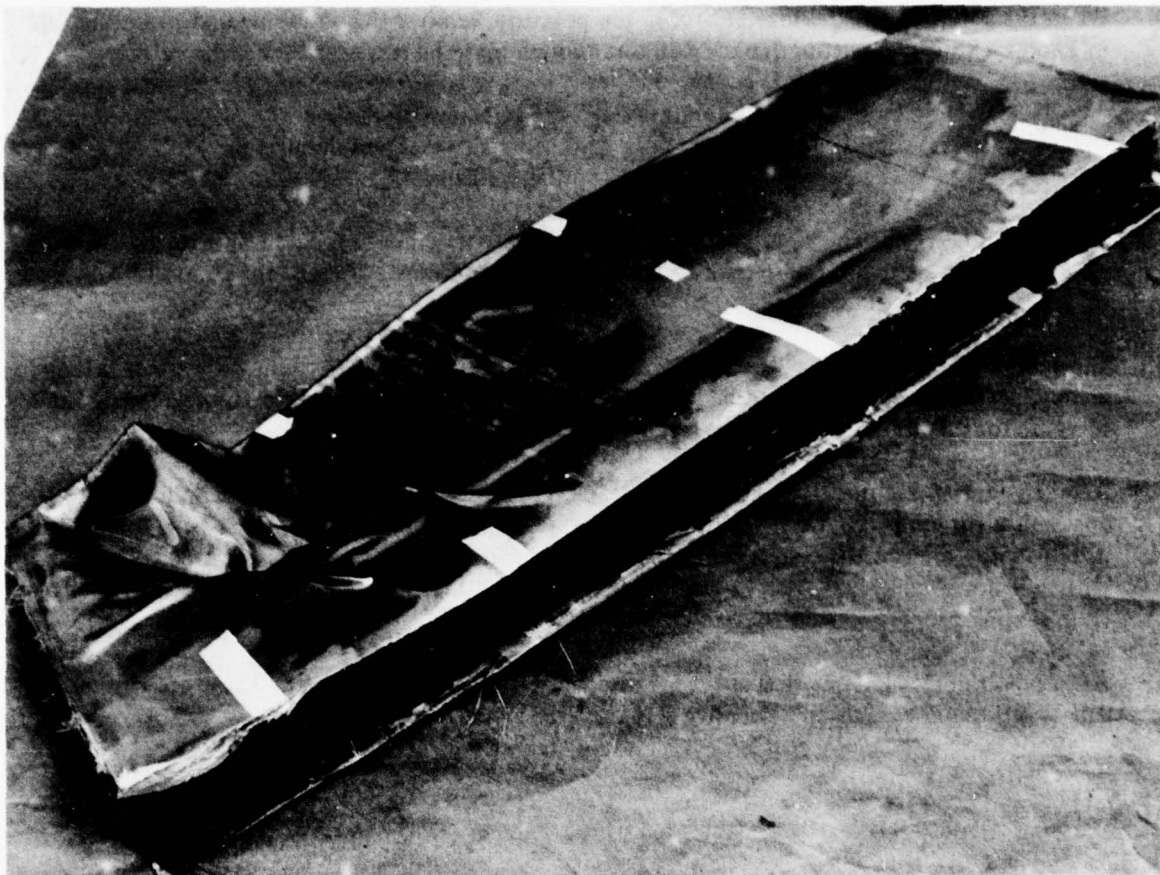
Wedge-Shaped Panel That Collapsed in Autoclave Due to Inadequate Tooling Support
